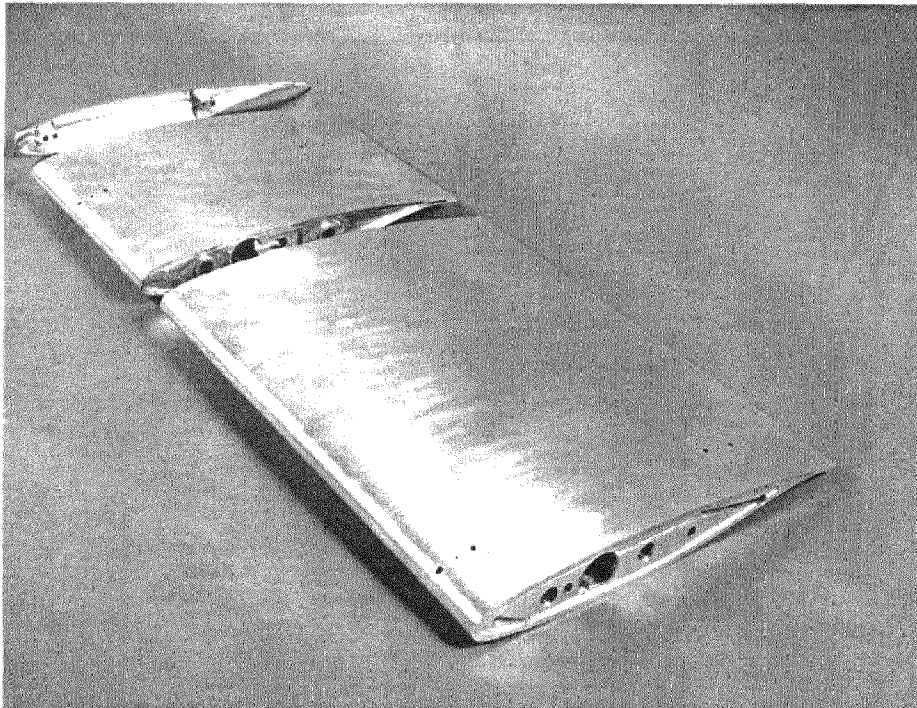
Photograph of Benchmark Supercritical Wing Model before assembly.
